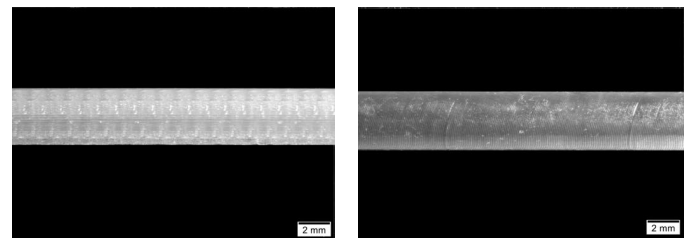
Side-on view of 3D printed vasculature printed using FDM (left) and stereolithography (right)
